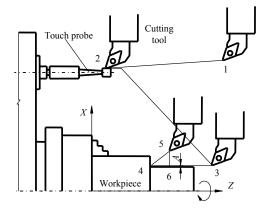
Measuring the dimension of the workpiece using the cutting tool
